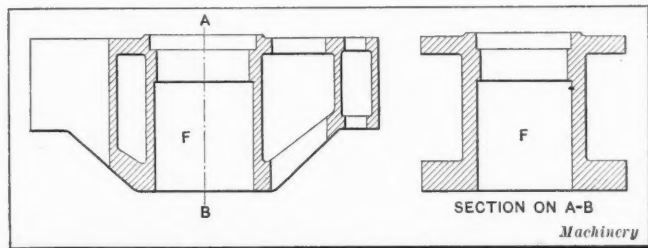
Bed Casting designed with Hole F to receive Cylinder
